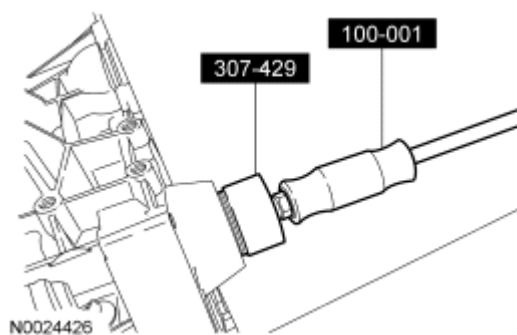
Removing RH Differential Seal Using Special Tools (1 Of 2)
